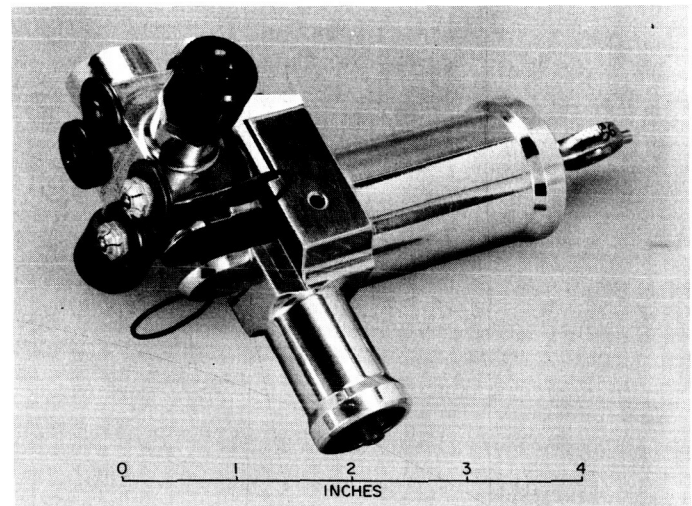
Ranger* damper assembled with pyrotechnic latch
